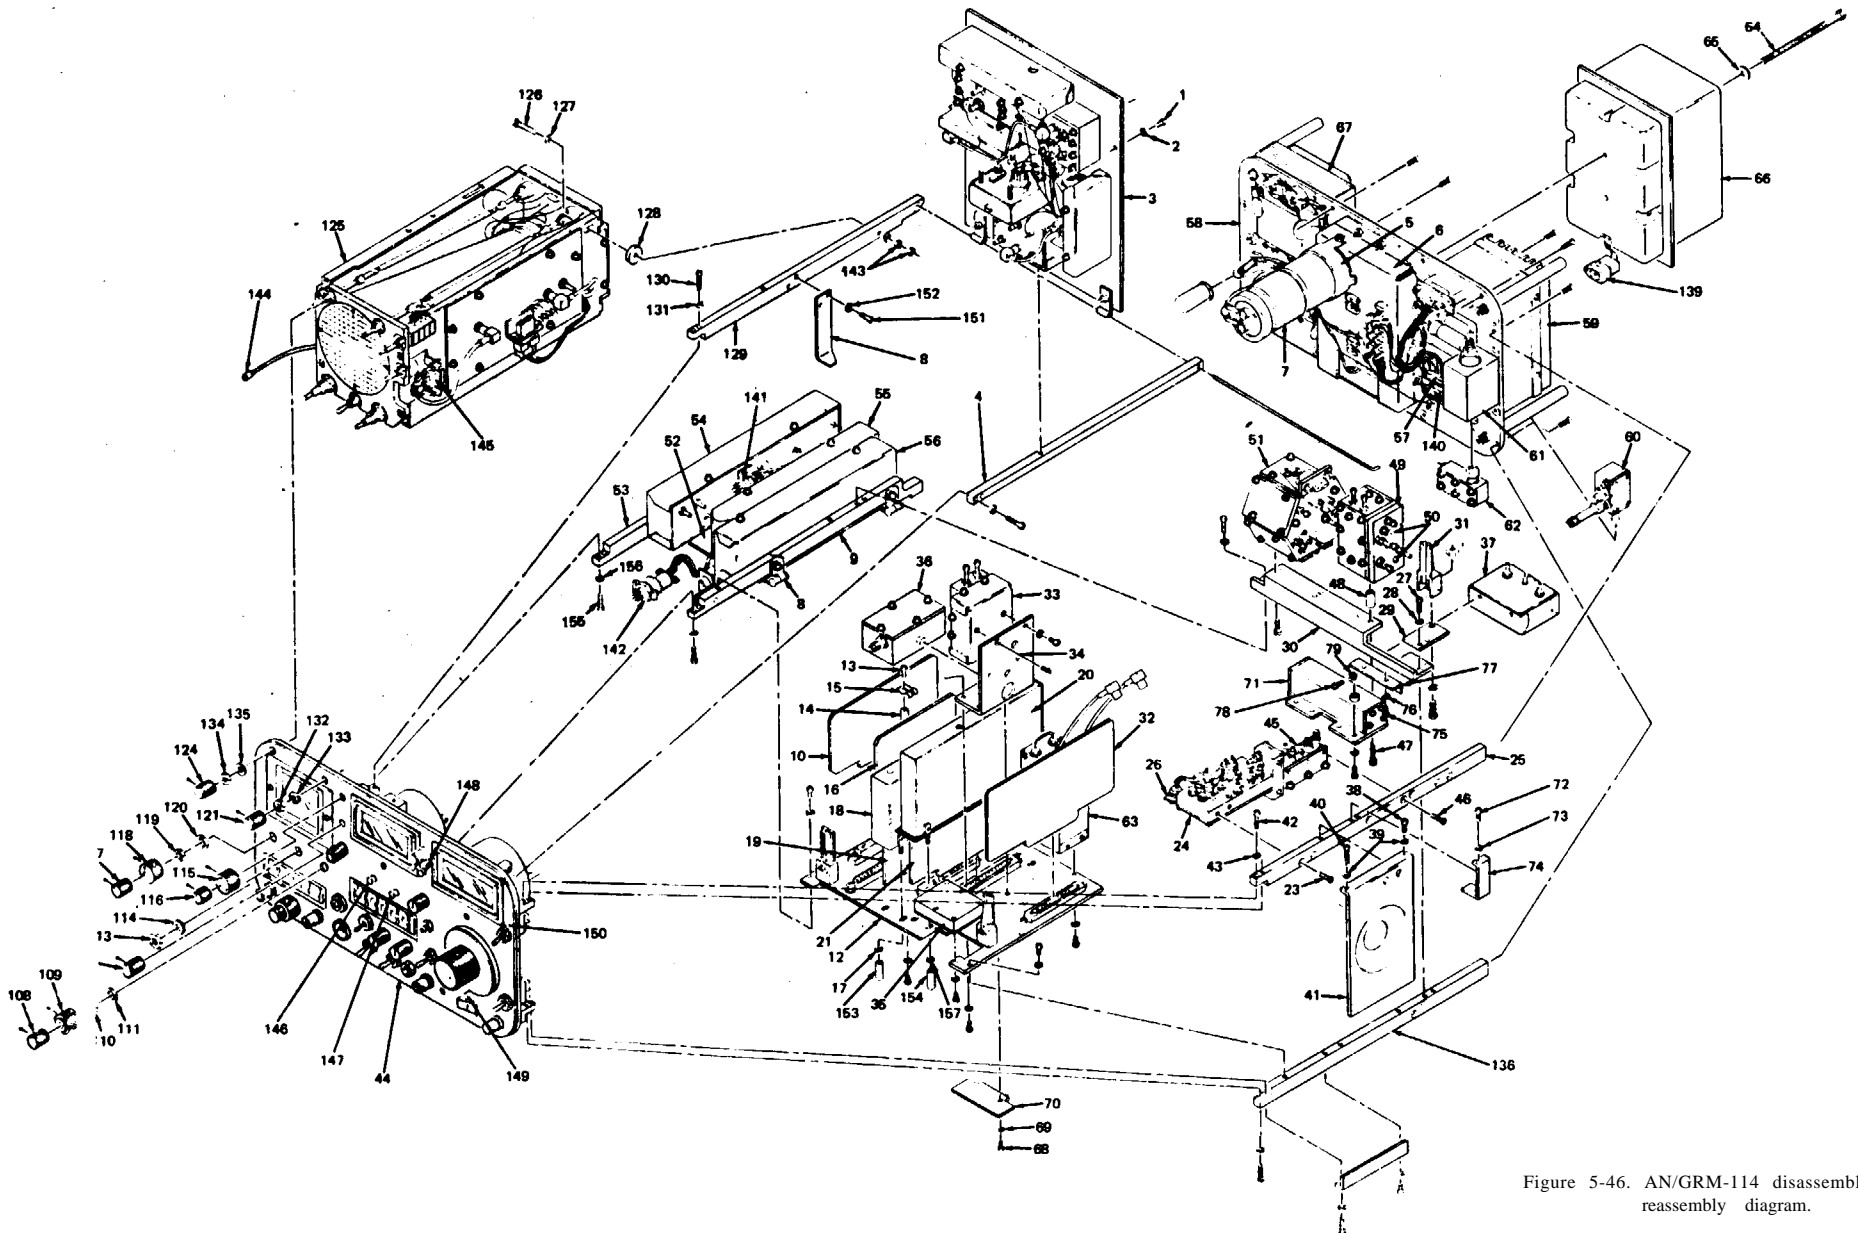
AN/GRM-114 disassembly reassembly diagram.
